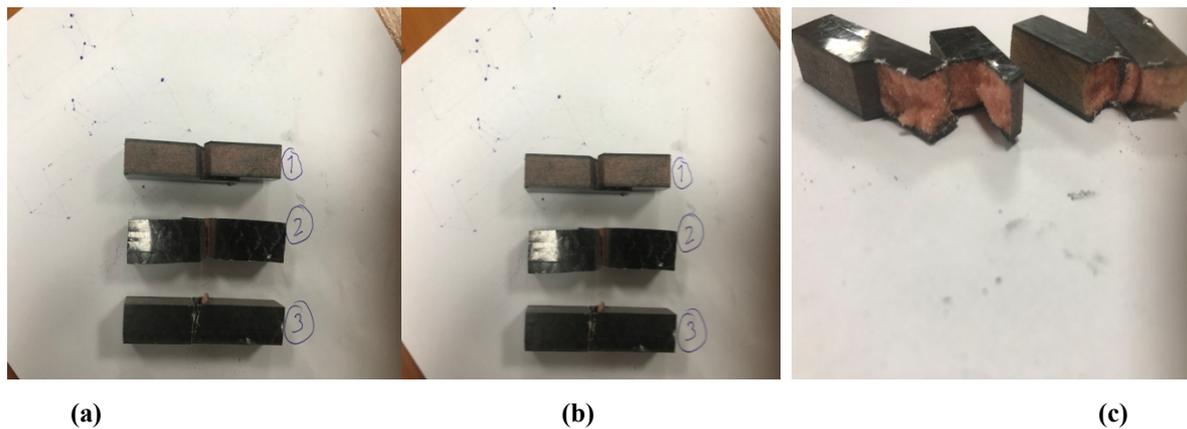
Sandwich composite specimens fractured under Izod Impact Test
